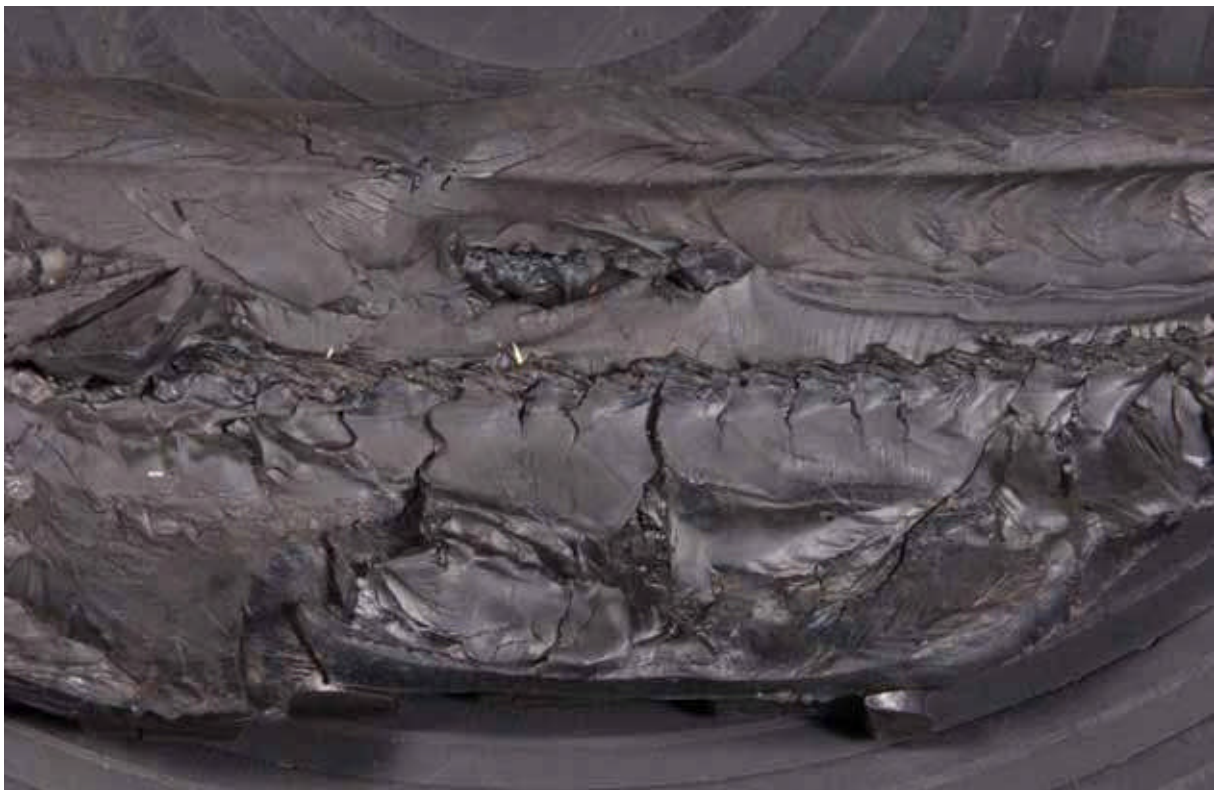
Torn Appearance of Shoulder Rubber, Serial Side, about 12:00
